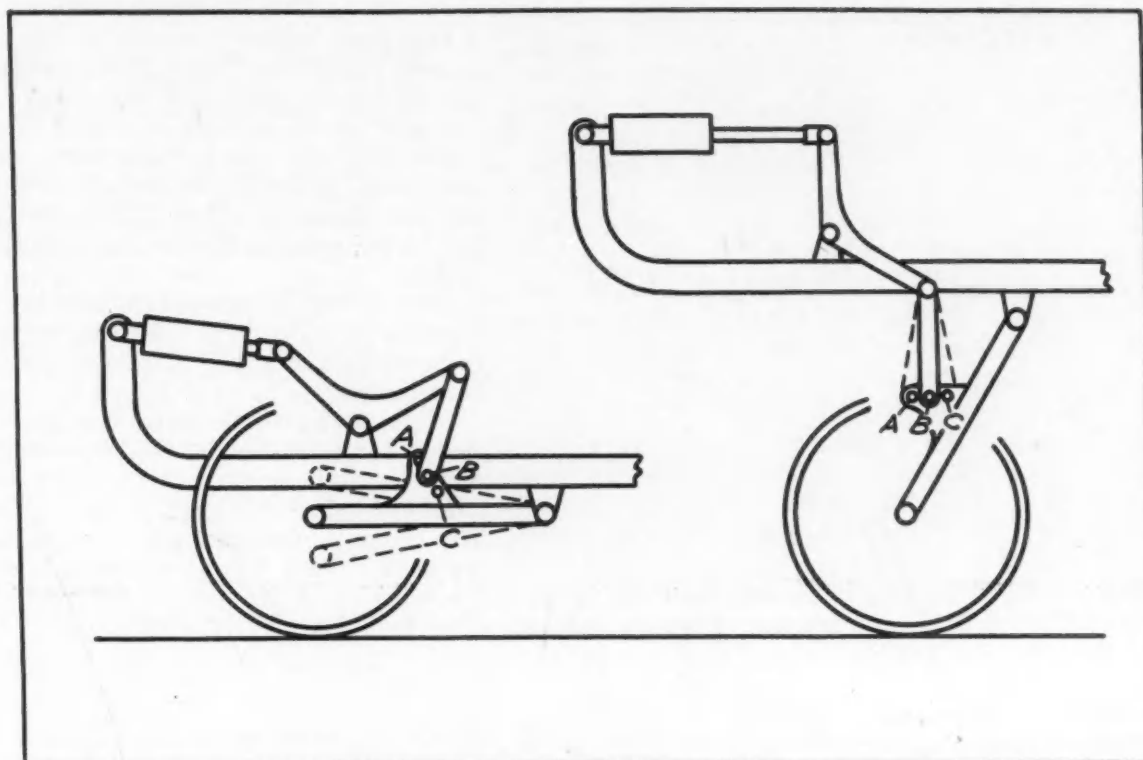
This adjustable control linkage permits a small tractor to handle a larger implement. It keeps maximum tool working depth within tractor drawbar horsepower
